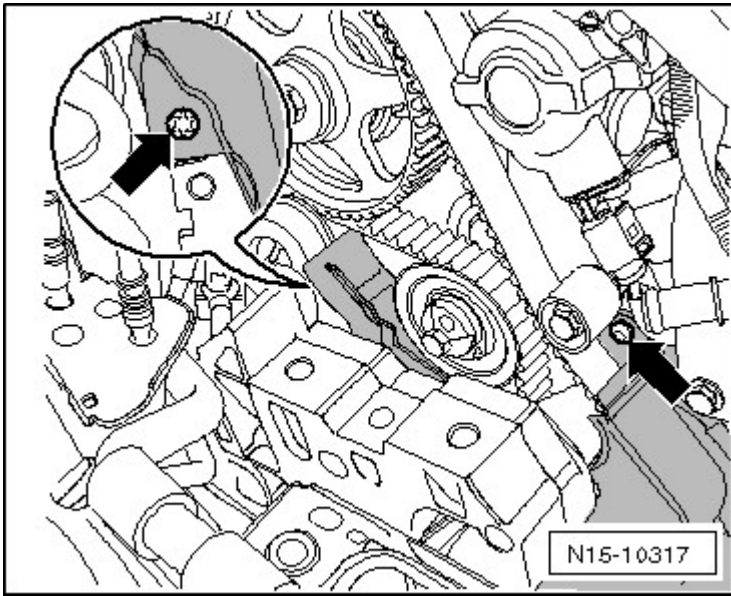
Identifying Toothed Belt Guard Upper Bolts
